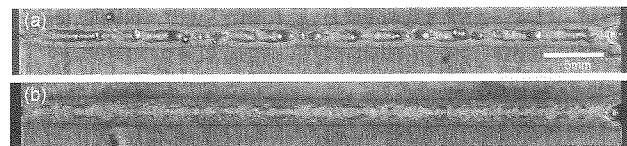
Weld bead appearances of pure copper using (a) conventional single spot and (b) beam mode control.
